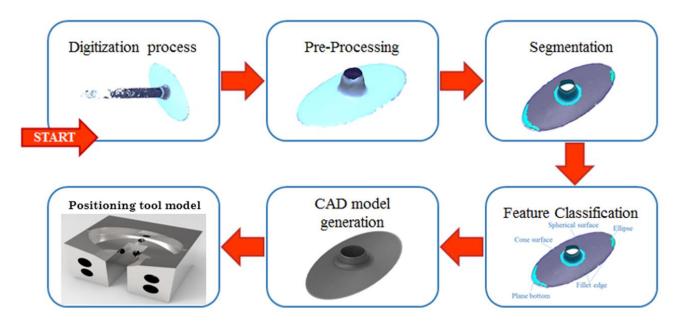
The Reverse Engineering Framework: CAD model reconstruction of the foot of the inner tube valve regarding the positioning tool 3D CAD model generation.
